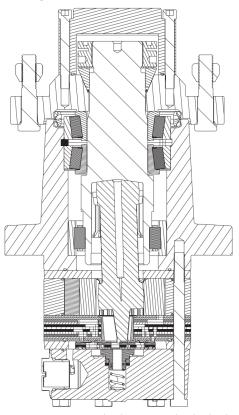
DT 740 Hydraulic Motor with Wheel Hub
